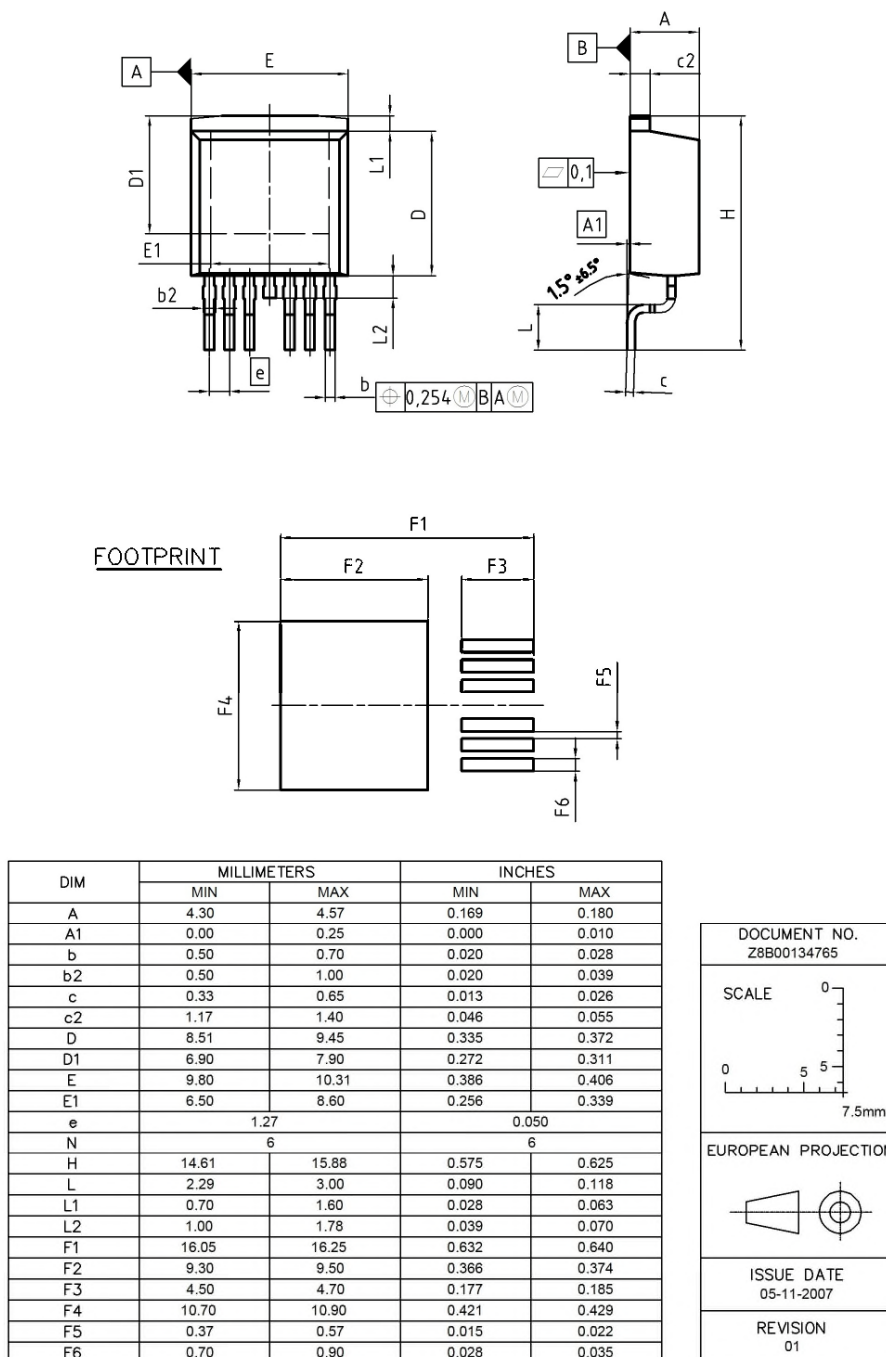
Outline PG-TO263-7, dimensions in mm/inches
